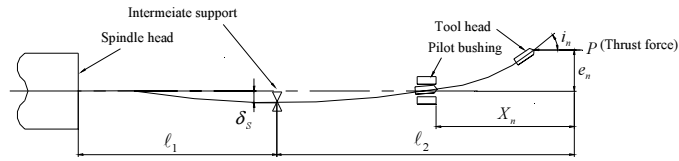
Drill shaft support misalignment in deep-hole drilling
